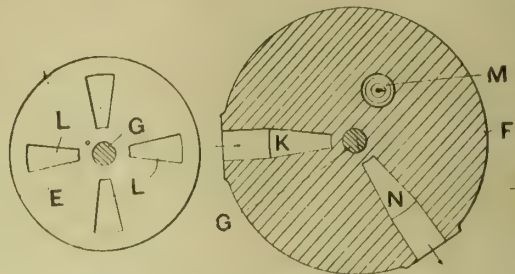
INTERNAL-COMBUSTION ENGINE WITH ROTARY VALVE.
